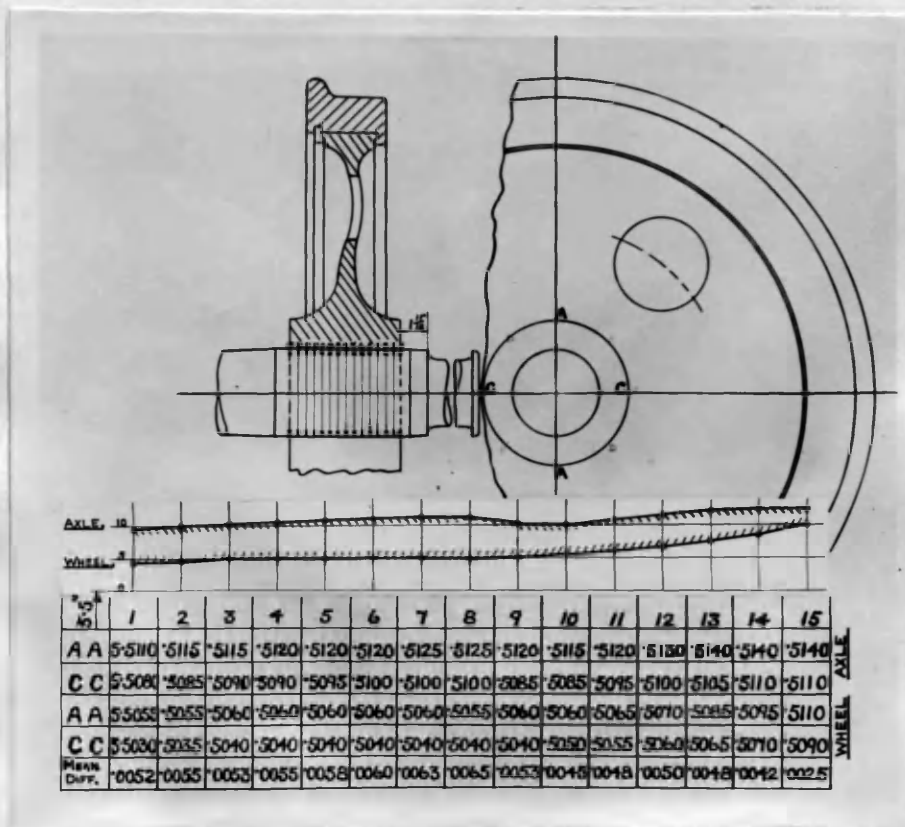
Mild Steel Wheel Centre Assembly which failed to satisfy Back Pressure Test.
